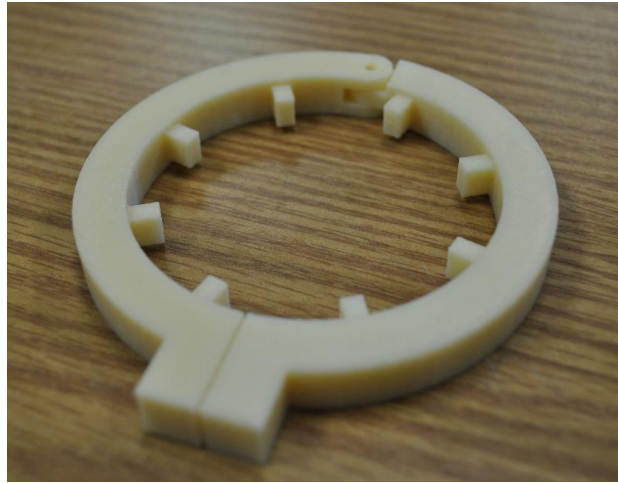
Photo of the 3D printed prototype of the transducer gripper.
